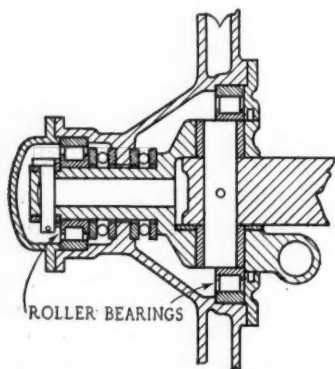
Leyland truck knuckle and wheel spindle. Knuckle pin is in central plane of wheel
